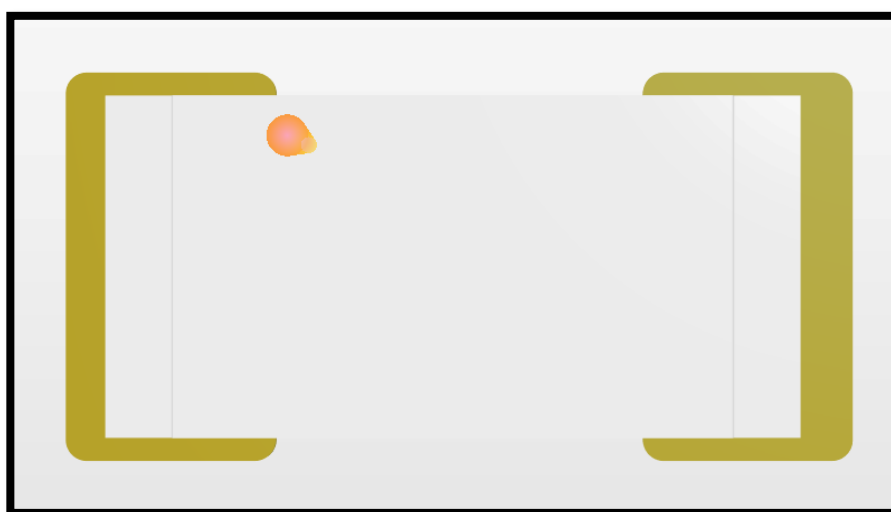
The 3D View of the 2512 Package Resistors in the Library
